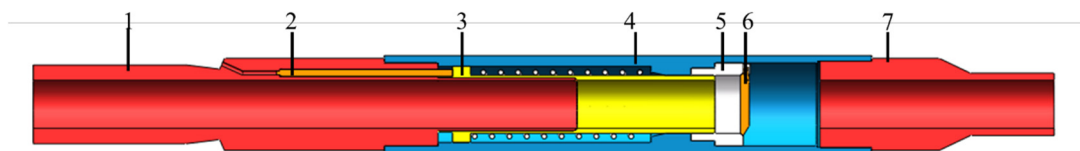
Schematic diagram of the underground safety valve structure. 1—Upper joint; 2—Plunger; 3—Central tube; 4—Connecting cylinder; 5—Valve seat; 6—Valve plate; 7—Lower joint.
